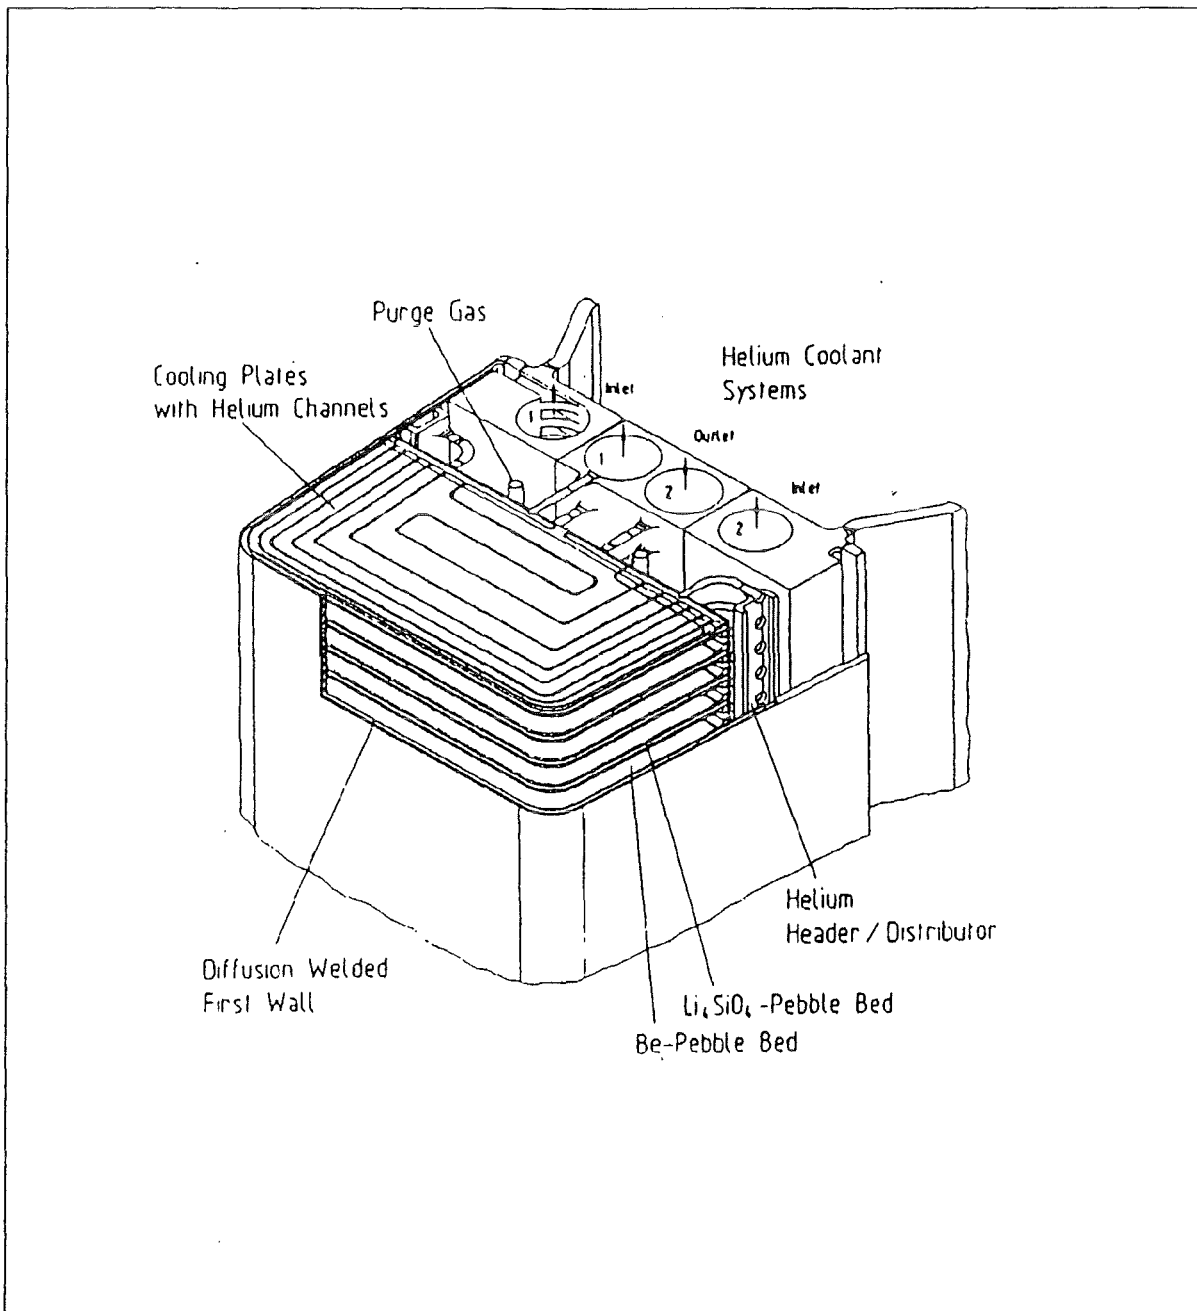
Isometric view of the BOT blanket (outboard segment).
